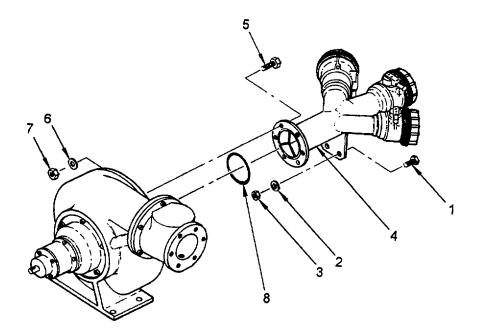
Inlet Manifold Outlet O-Ring Replacement
